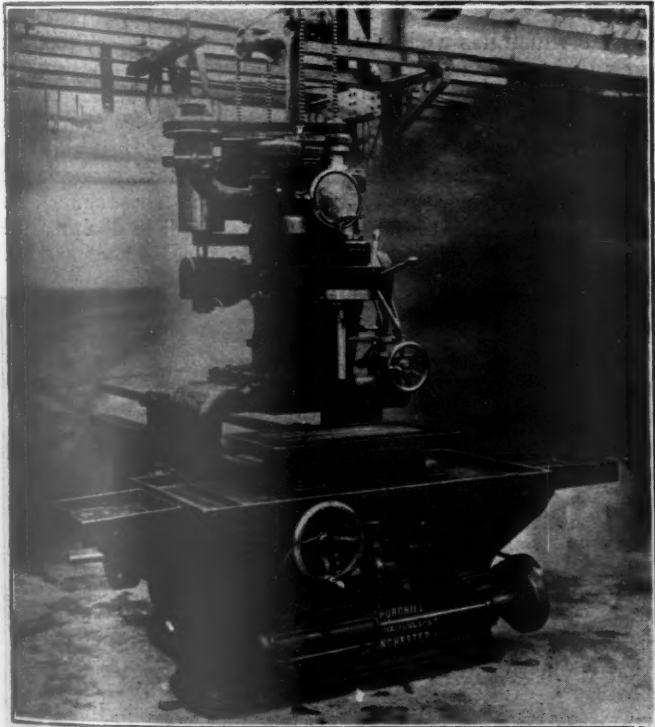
Vertical Spindle Radius Link and Hole Grinder
